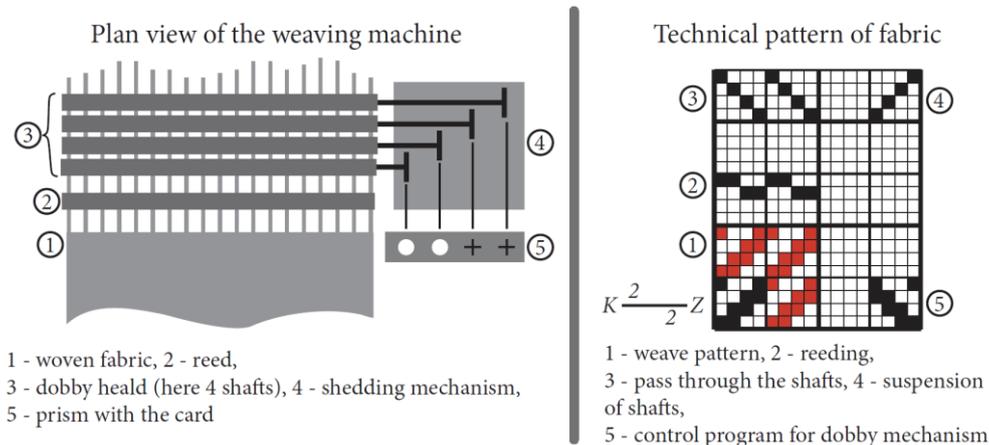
Plan view of the weaving machine and example of the technical pattern of fabric
